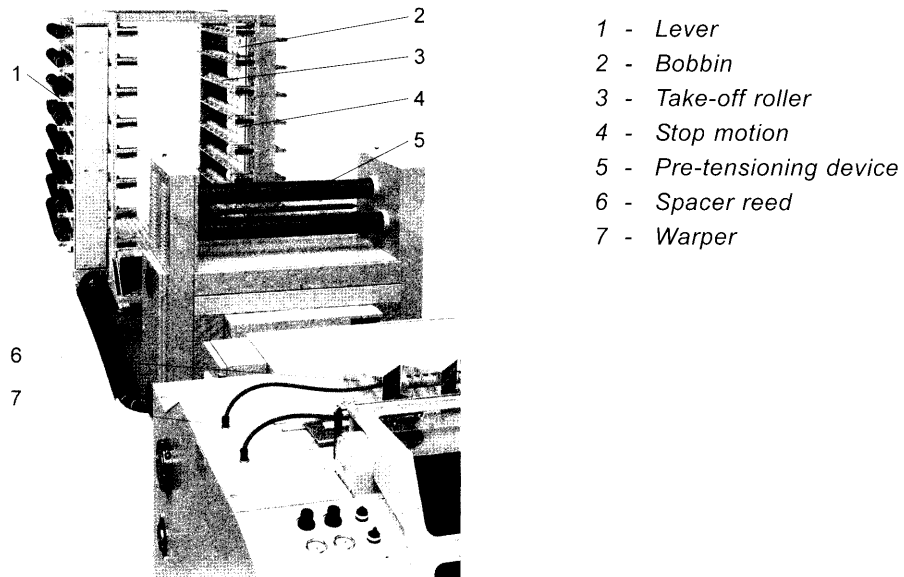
Schematic of a unrolling creel placed parallel with the warping machine
